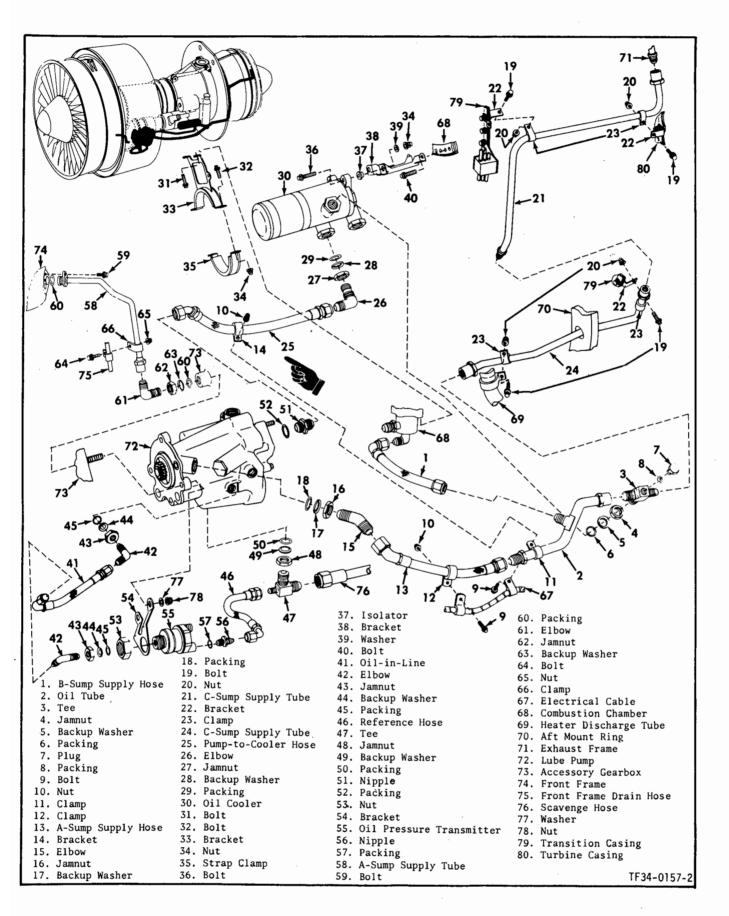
Oil Cooler, Pressure Transmitter and Oil Supply Lines
